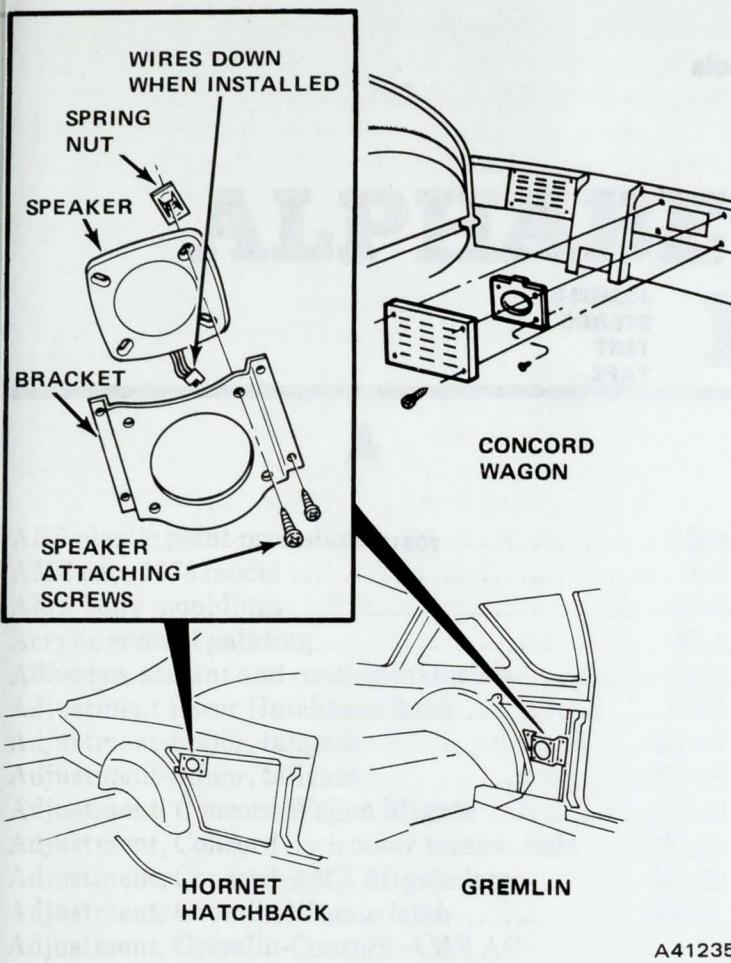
V-19 Rear Speaker Installation—Gremlin-Concord-AMX
